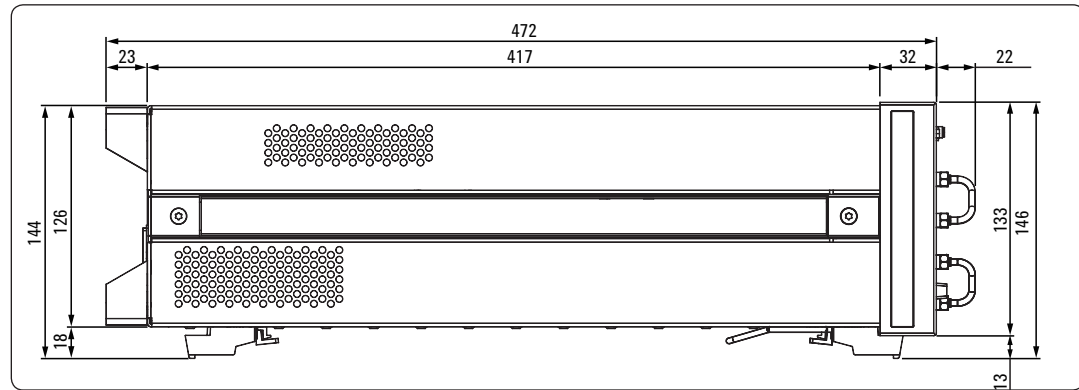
Dimensions (side view, with Option E5092A-020, in millimeters, nominal)
